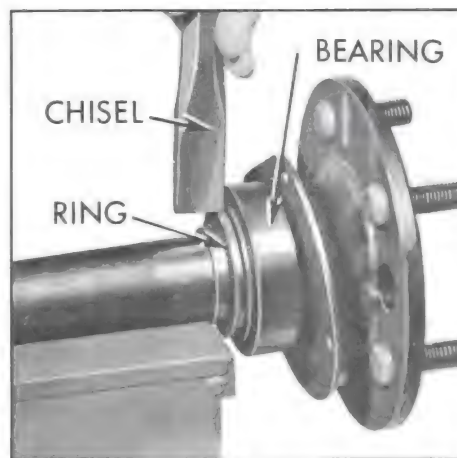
Removing Rear Wheel Bearing Retaining Ring
